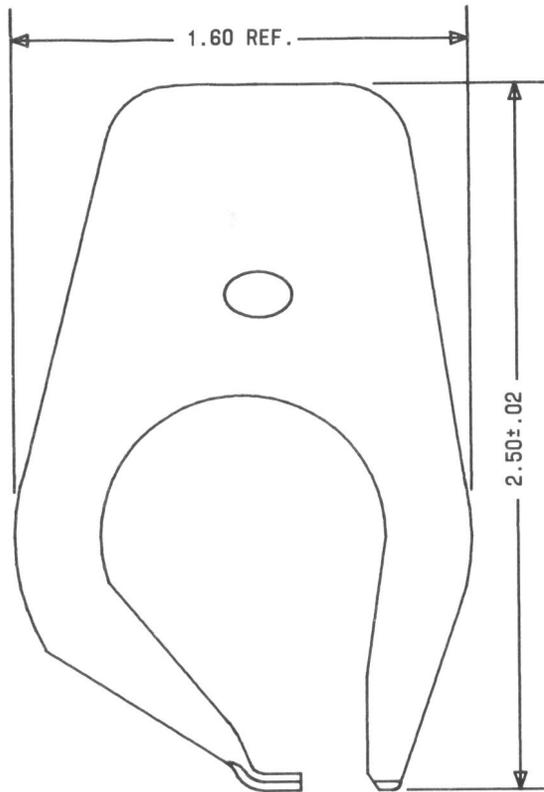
AT-8927 C Bridge Removal Tool—Front View
